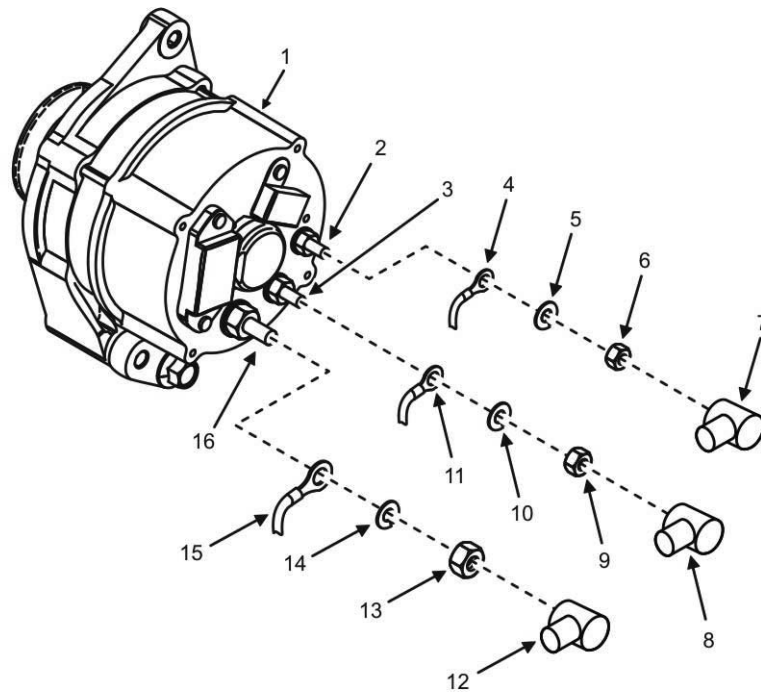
Battery-Charging Alternator Assembly — Wiring.
